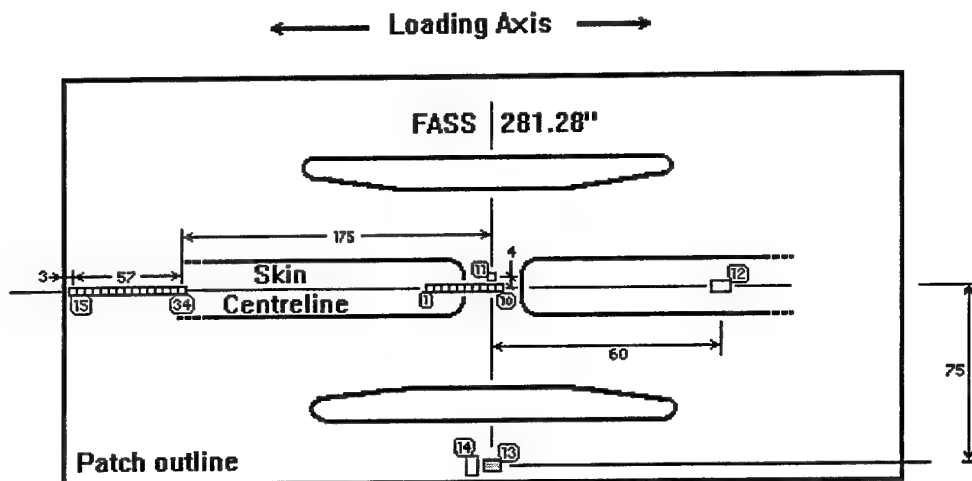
View onto Box 2, Skin 1 specimen shows strain gauge locations on boron patch relative to skin geometry.
